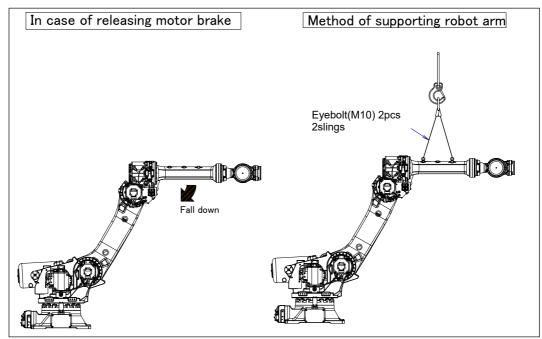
(b) Releasing J3-axis motor brake and measures (except R-2000*i*C/220U/190U)
